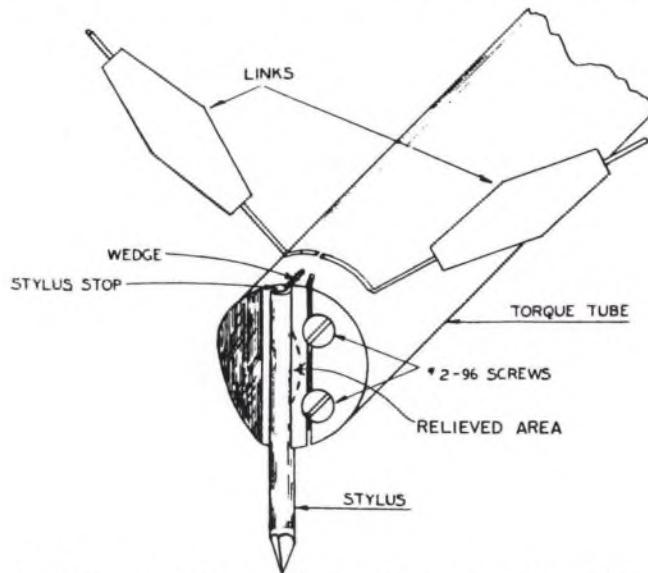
Three-point grip device for cutterhead-to-stylus coupling.
